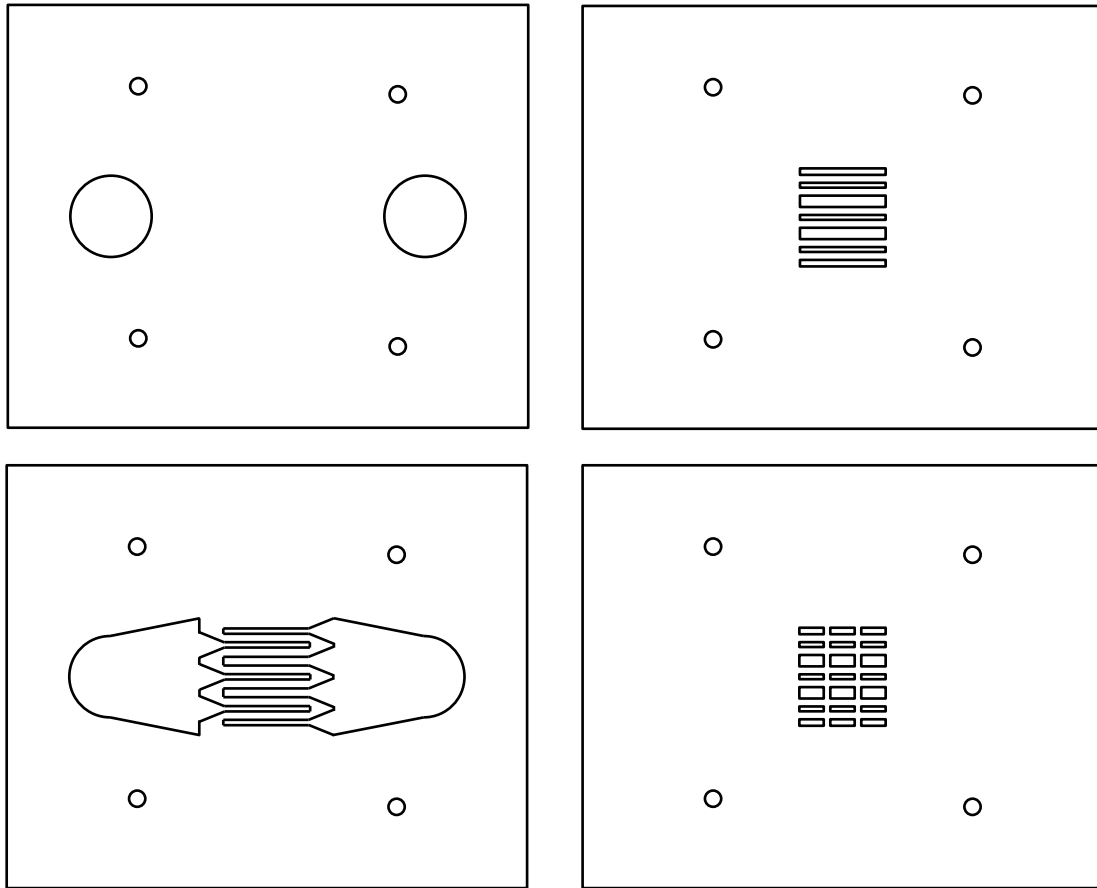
Technical drawings of the manifold; all dimensions in inches unless otherwise specified.
